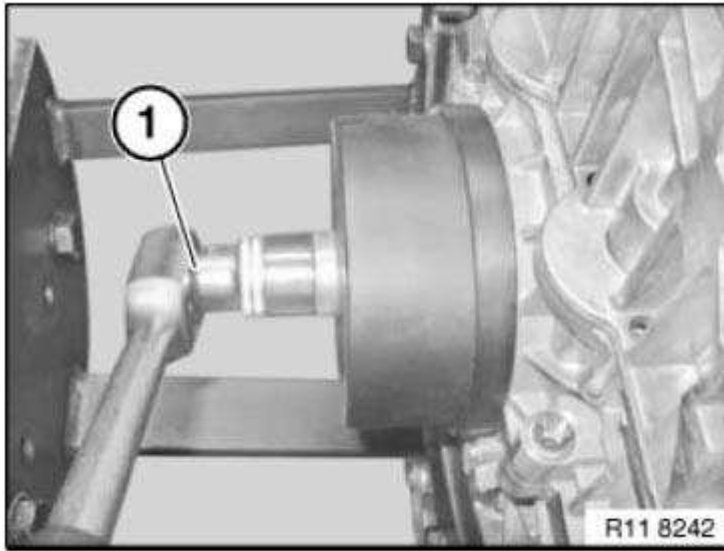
Screwing On Radial Shaft Seal Using Special Tool 11 9 183
